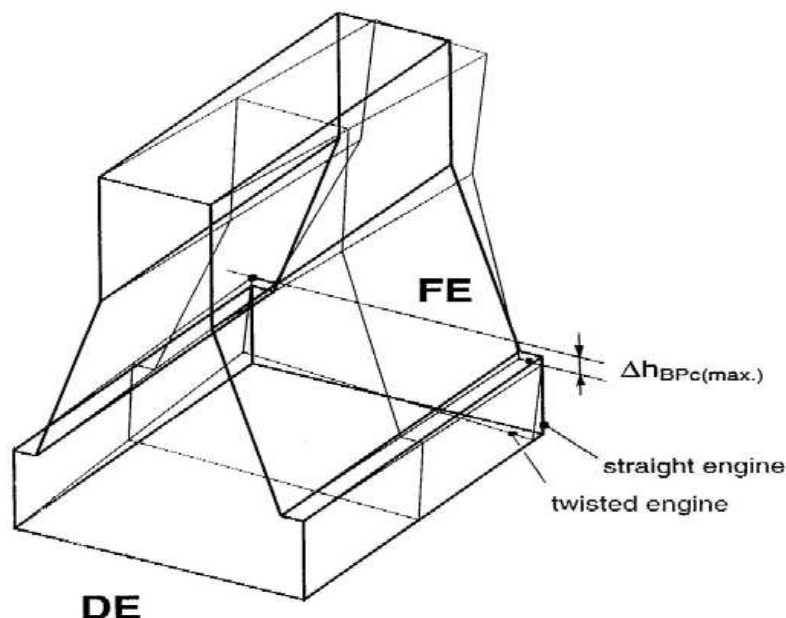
Parallelism of engine drive end (DE) to engine free end (FE)
